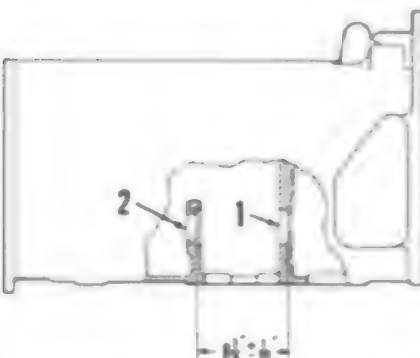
Install countershaft needle bearing (2) and pto bell bearing (1) as shown.
